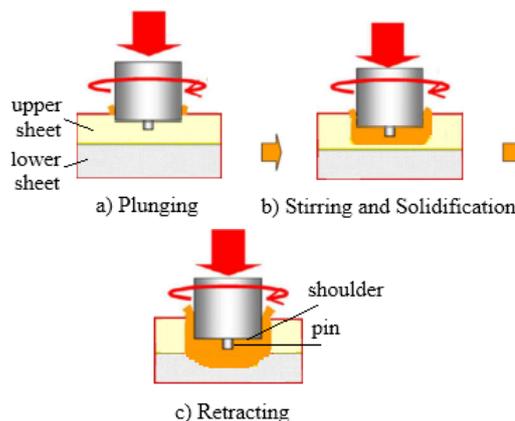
Friction stir spot welding (FSSW) process.
